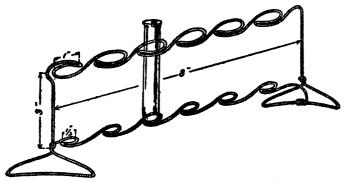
HOW TO MAKE A WIRE TEST-TUBE STAND.
